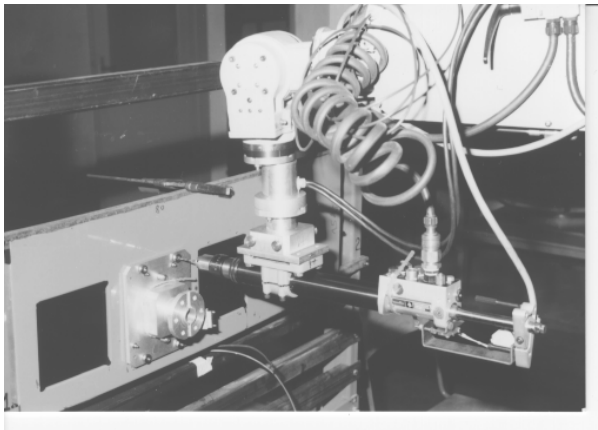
Robotised drilling using intelligent fixture Fig. 2. Intelligent drilling fixture (rear view)
